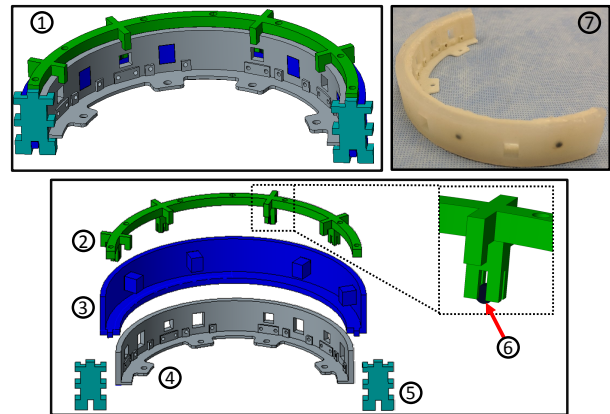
① Mold components assembled onto 3D-printed half-disk, ② custom fixture used to suspend the magnets at desired height and radial position, ③ mold with extrusions to maintain 9 mm × 7 mm windows for time-of-flight sensors, ④ half-disk on which the sensors are mounted, ⑤ side covers to clamp and seal the mold-disk assembly, ⑥ cylindrical magnet, and ⑦ prototype of silicone sleeve casted directly onto a 3D-printed SDU half disk.
